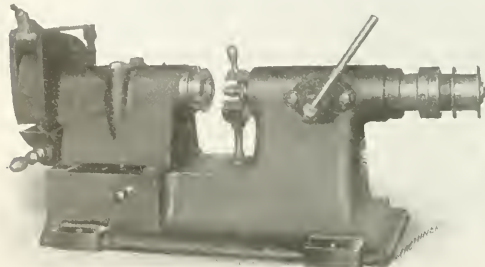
"Esco" Fuse Time-ring Grooving Machine, showing Arrangement of Work-holding Fixture and Milling Cutter
